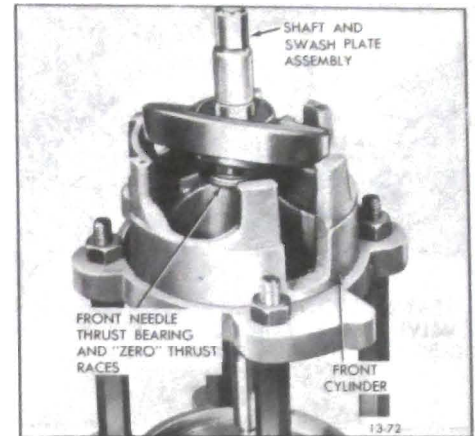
Shaft and Front Needle Thrust Bearing in Cylinder Half
